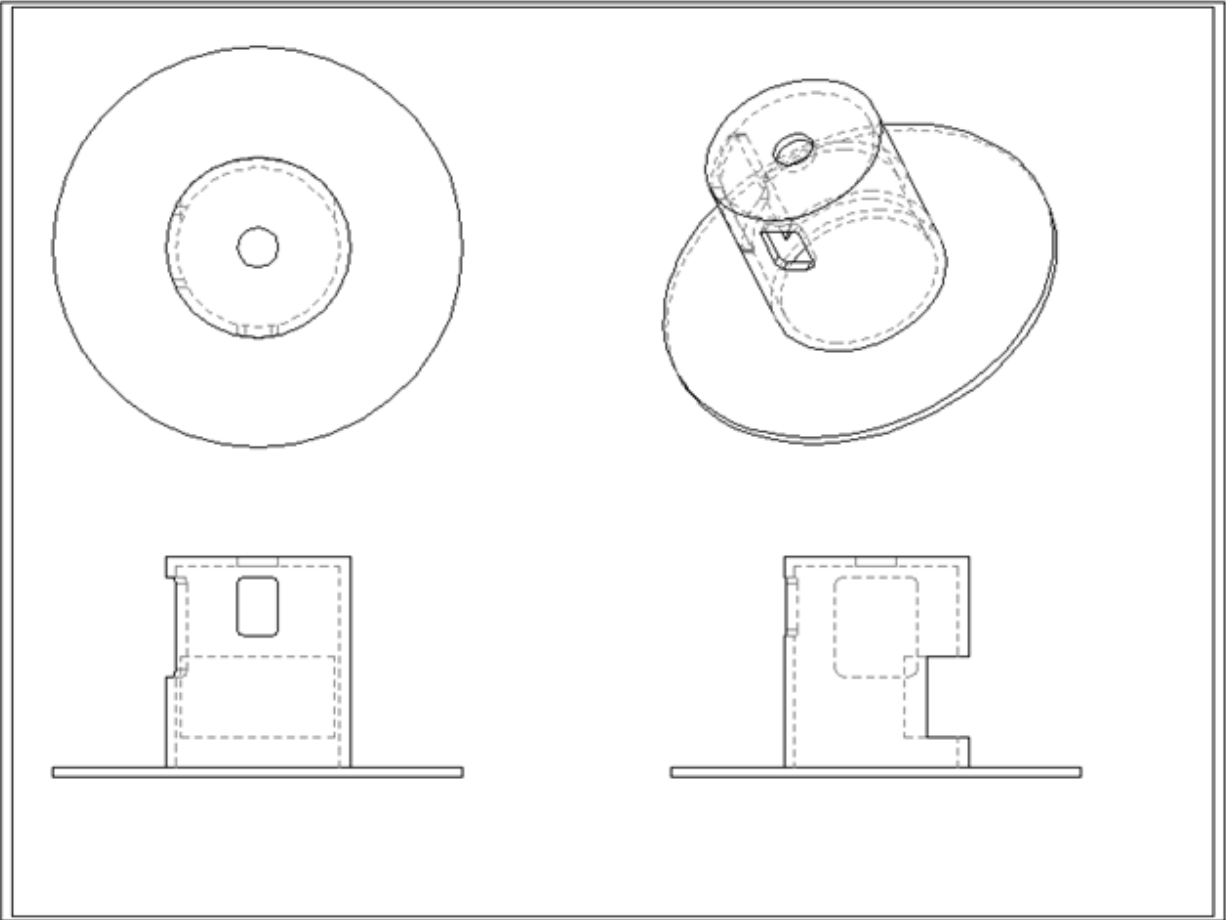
Final Drawing of the Encoder Flange (Nelson, 2010)
